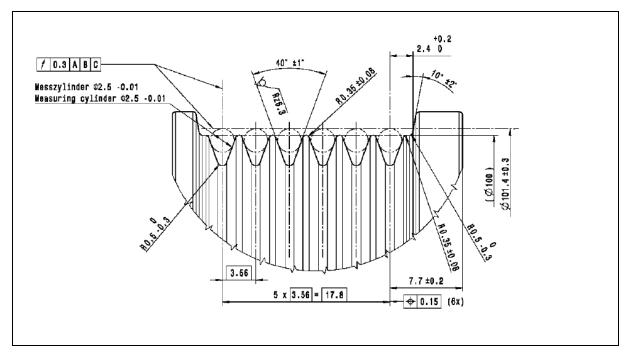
Detail U - Drive pulley for refrigerant compressor (example DENSO-7SEU17)
